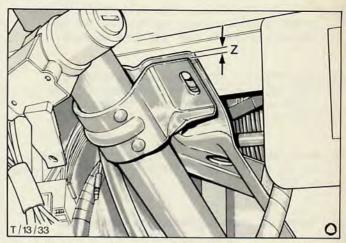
Adjust steering column until a gap of 5mm (Z) exists between bracket and pedal box bracket.
